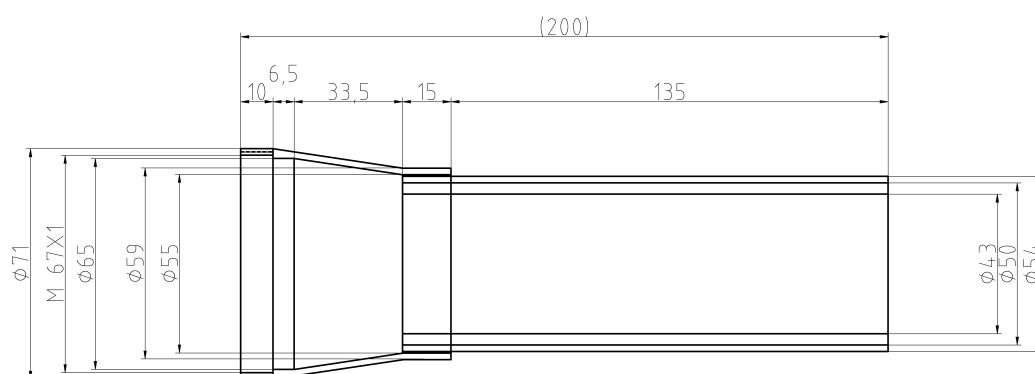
Technical drawing of the BSCCO shielding tube with the holding structure and thread for installation on the insert.
